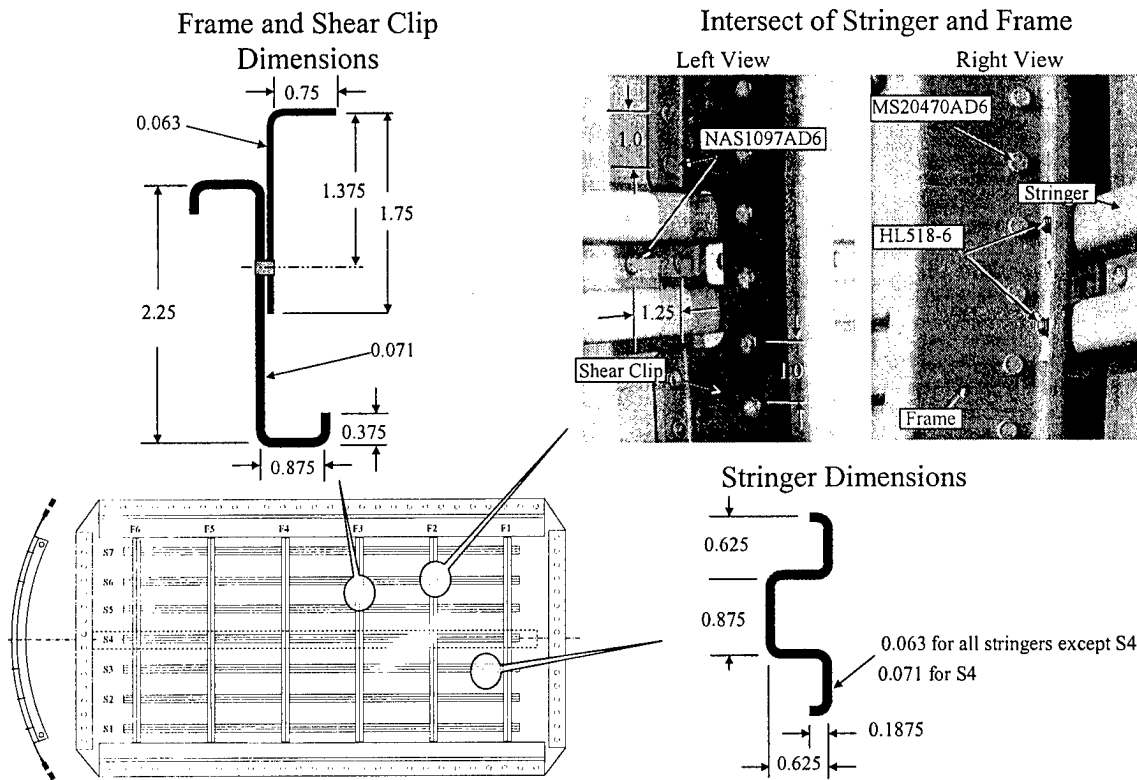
DIMENSIONS OF FRAMES, STRINGERS, SHEAR CLIPS, AND INTERSECT OF STRINGER AND FRAME
